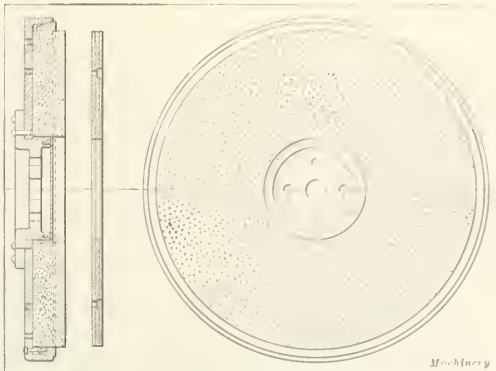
Construction of Pressed Steel Chuck used on Besly Grinder
